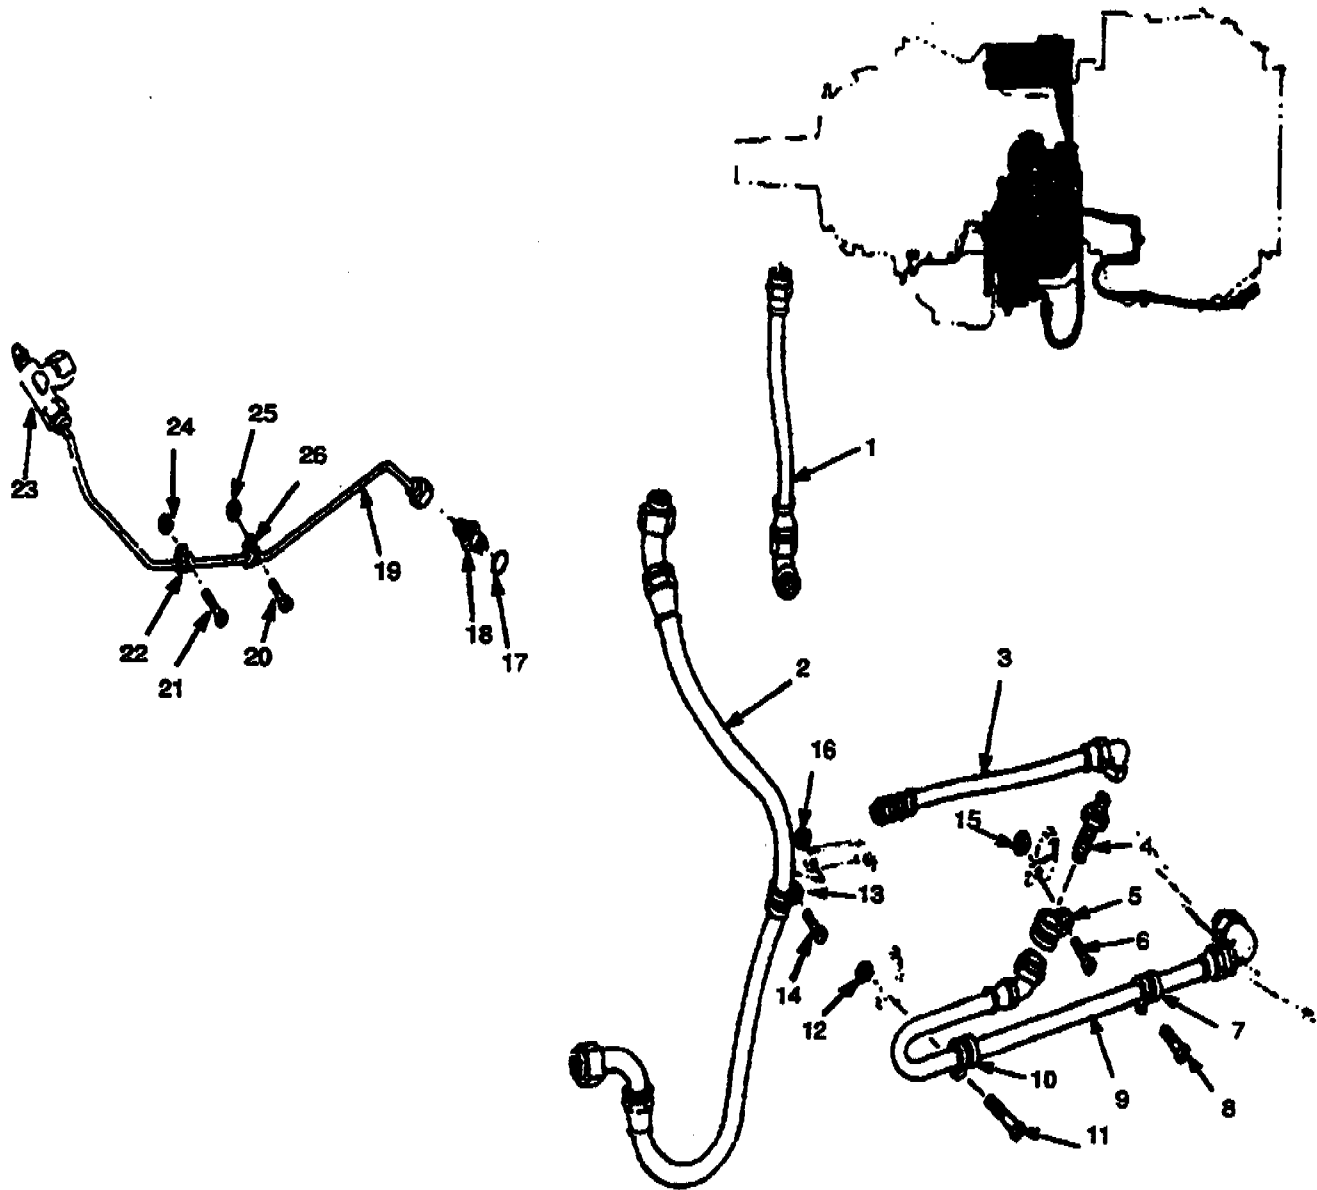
Main Fuel Hose and Torque Limiter Tube Assemblies and Attaching Parts (T53-L-15, -701, -701A).
